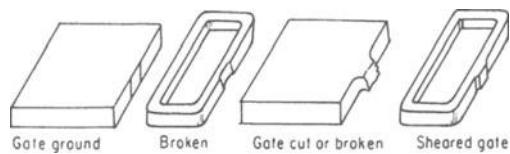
Some gates must simply be cut, sheared with fixtures, ground, or finished, but those broken off from the parts to save finishing costs could retain their recesses or protrusions.
